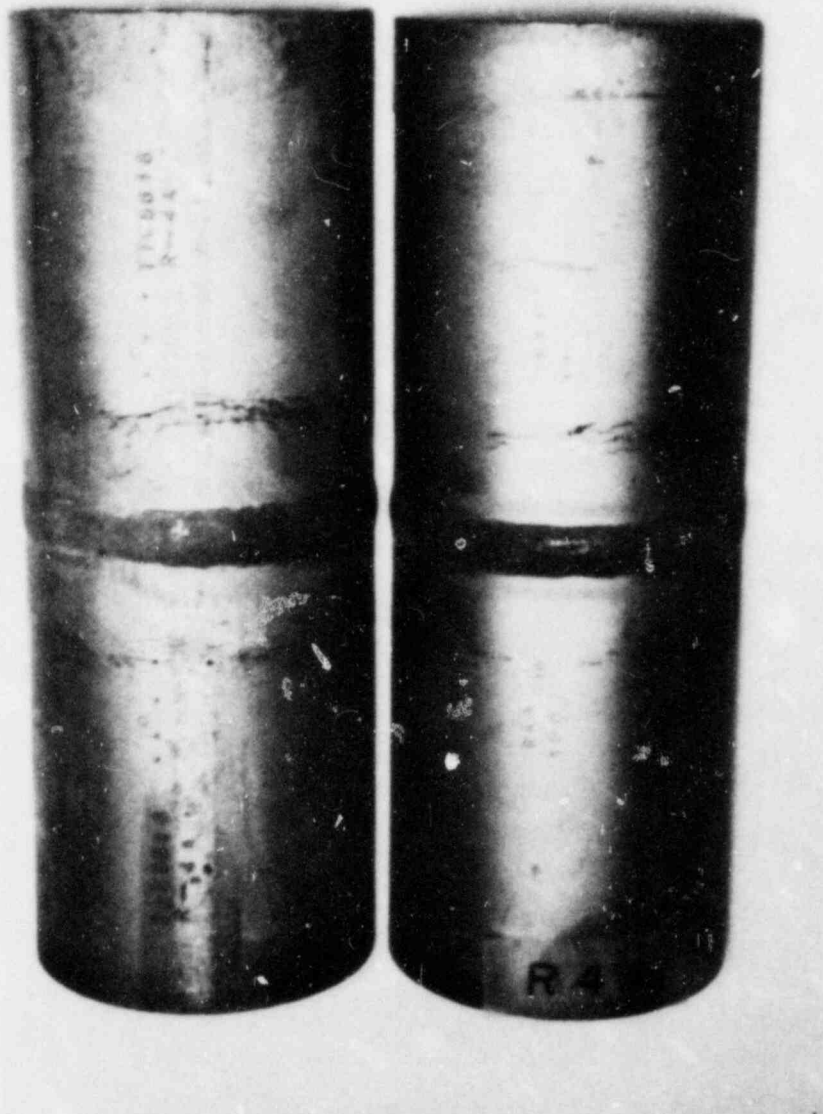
CRACK PATTERN OF 4 IN. SS PIPE WELD SPECIMEN (AS WELD)
